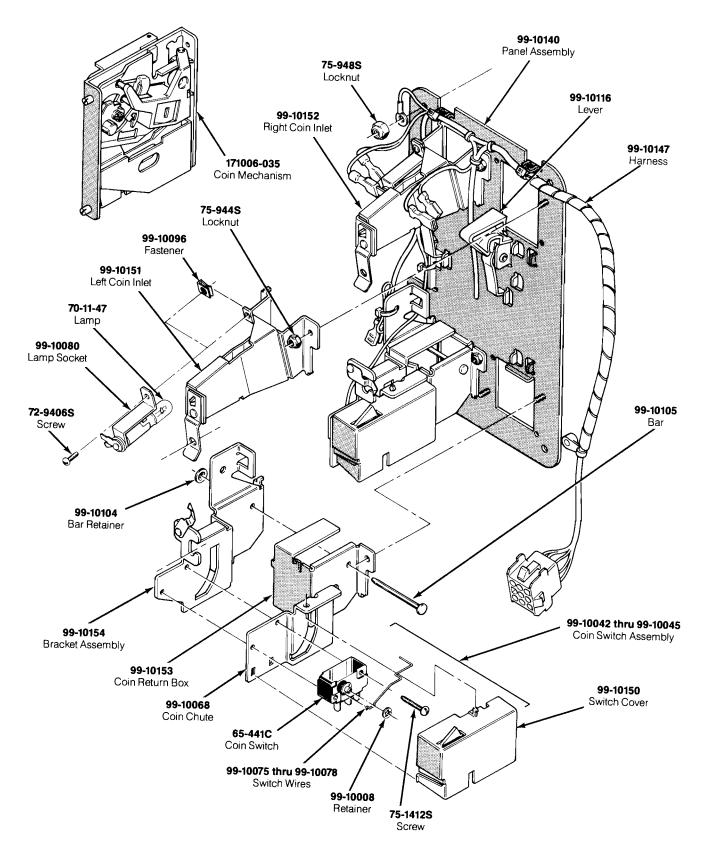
Coin Acceptors, Inc. Coin Door Assembly 171027-001 A
